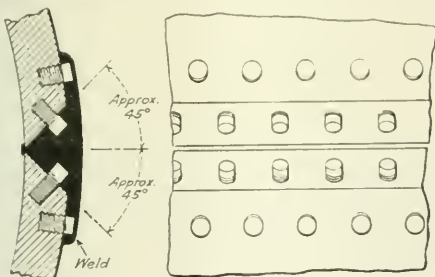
Section to Be Welded Is "V'd" Out with an Air Chisel and Studs Are Placed in Staggered Rows
